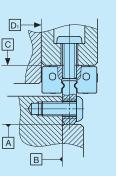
Reference mounting surface of LWL1···Y and typical mounting structure @
